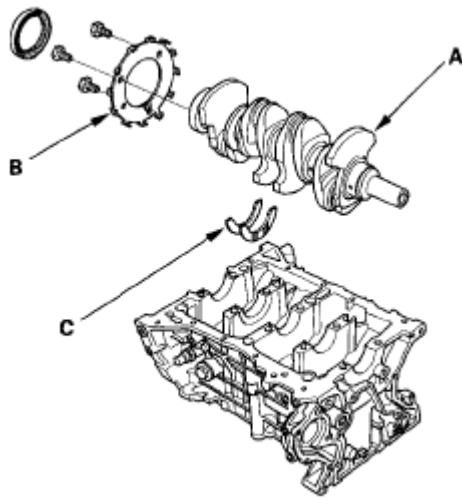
Identifying Crankshaft Position (CKP) Pulse Plate And Crankshaft
